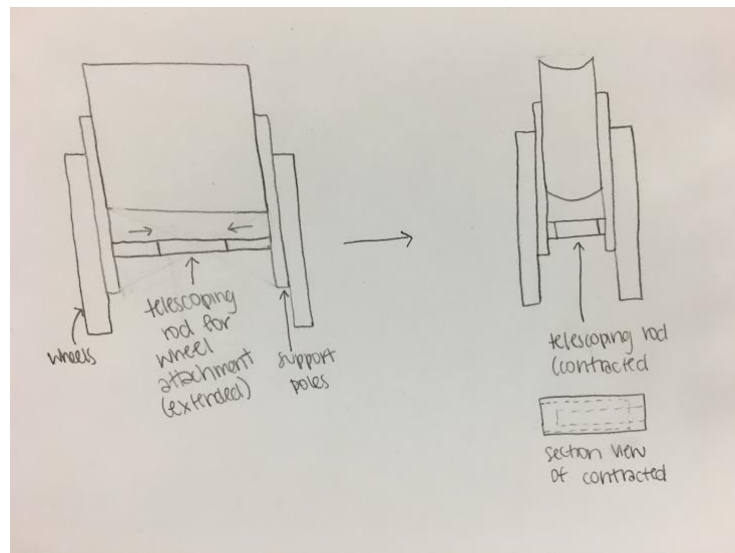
Telescoping rod attachment mechanism drawn by Catherine van Blommestein
